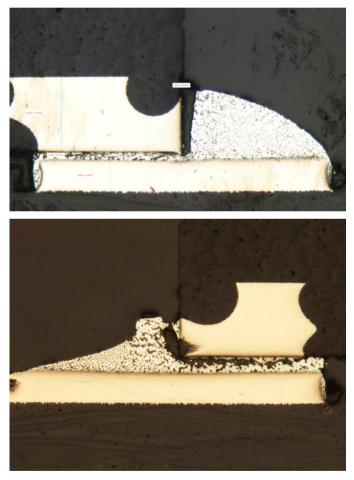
Cross-section of SnPb soldered QFN component with 7 ppm/°C mold compound and non-wettable flanks
